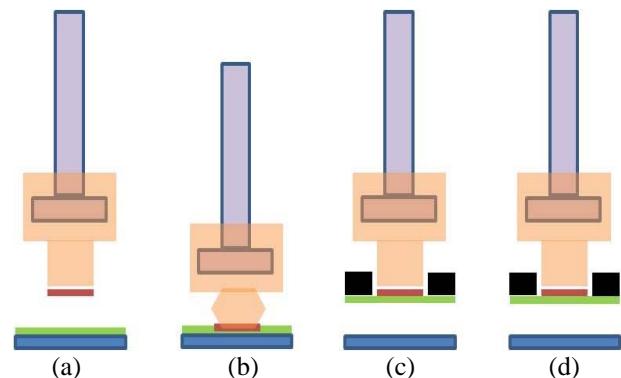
The imprinting and demolding conditions: (a) Ready, (b) Imprinting- 130°C, 30bar, 5 min (c) Cooling – from 130°C to room temperature, (d) Demolding – measurement of the demolding forces.
